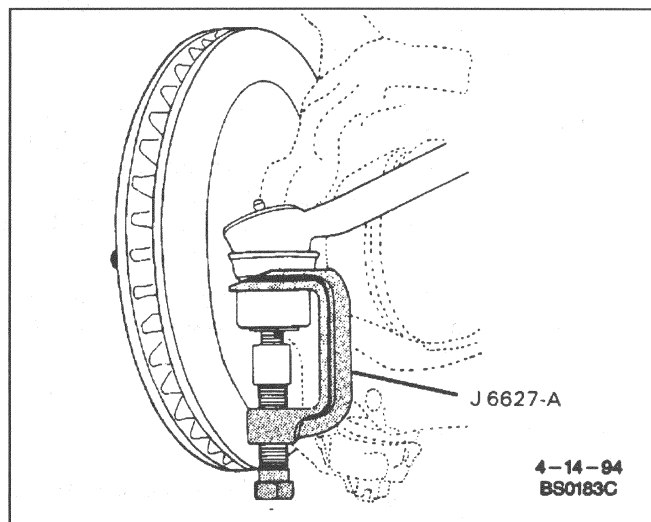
Separating Steering Linkage Outer Tie Rod End (Typical)
